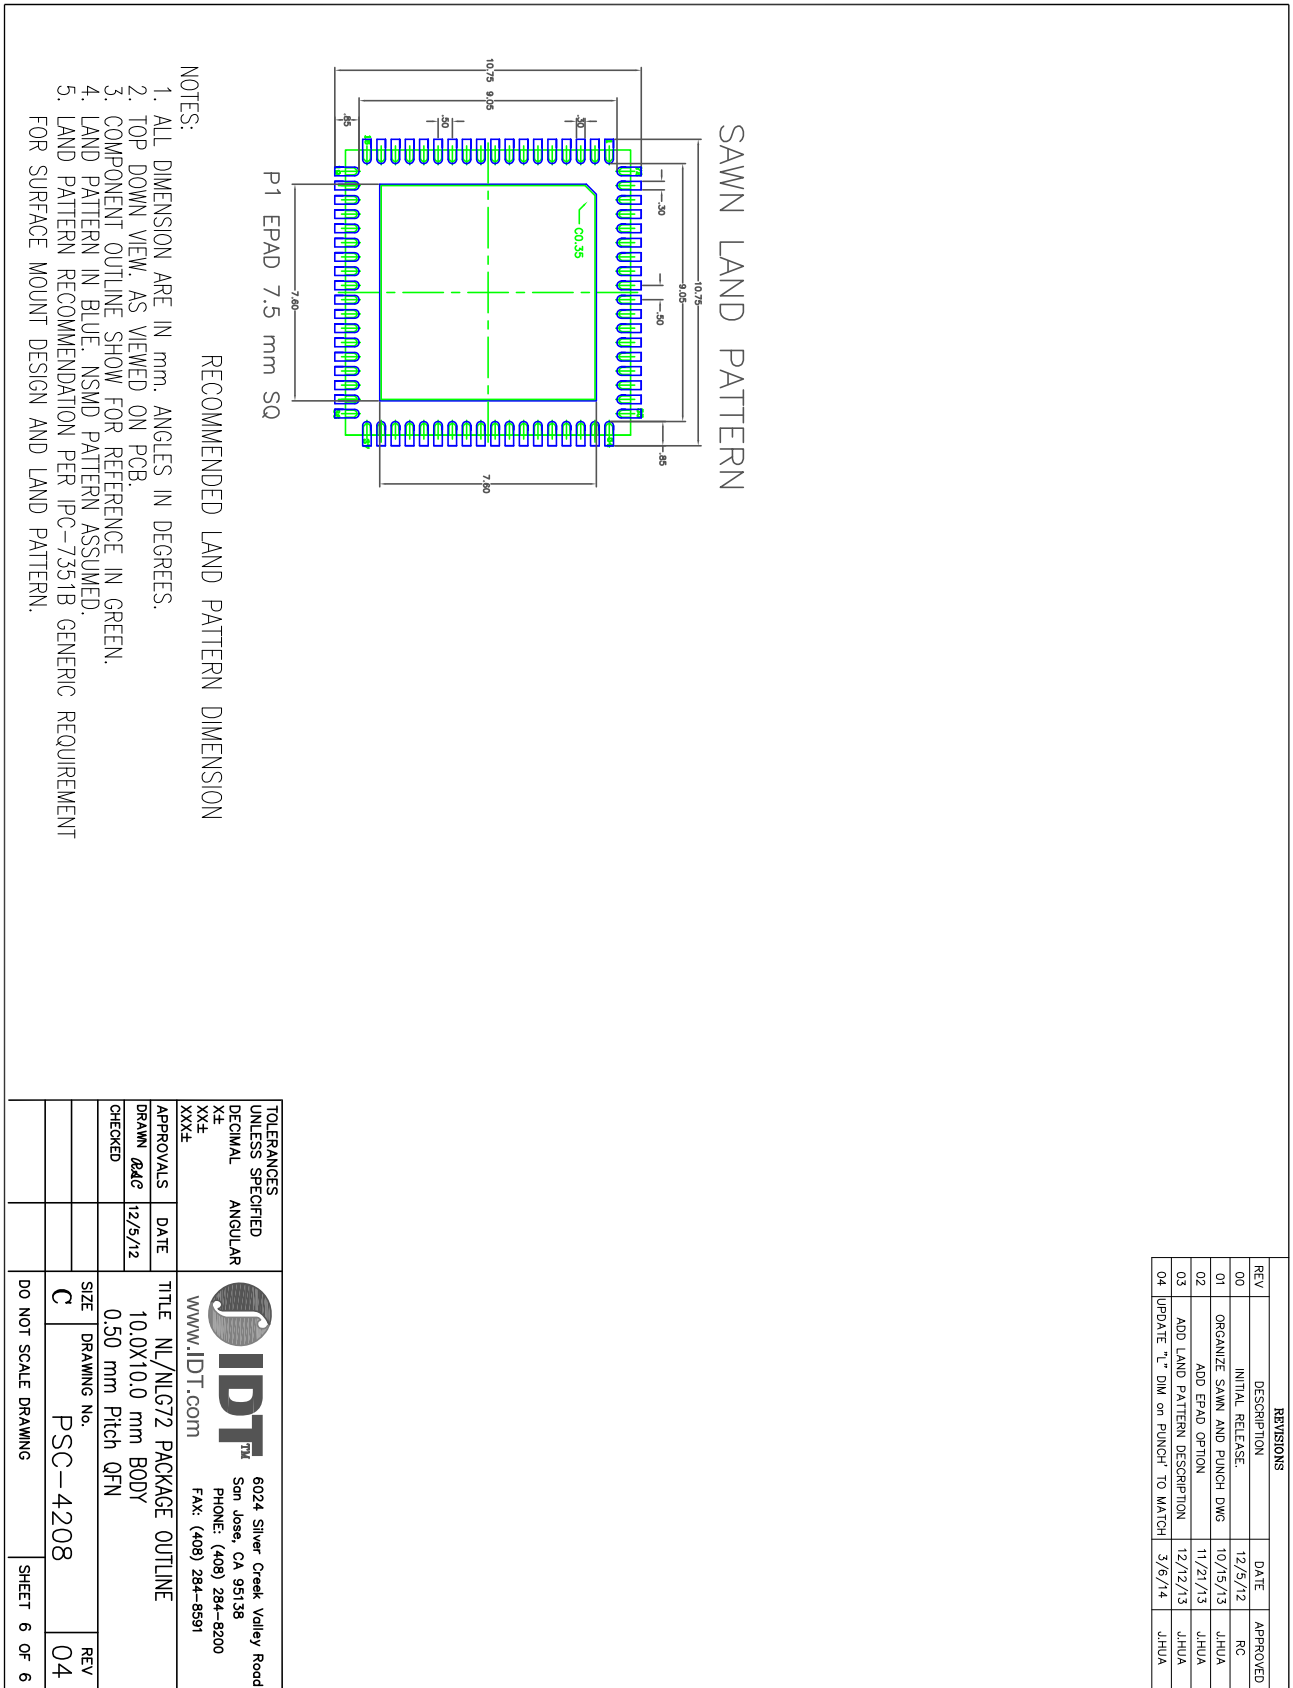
72-Pin QFN Package Recommended Land Pattern
